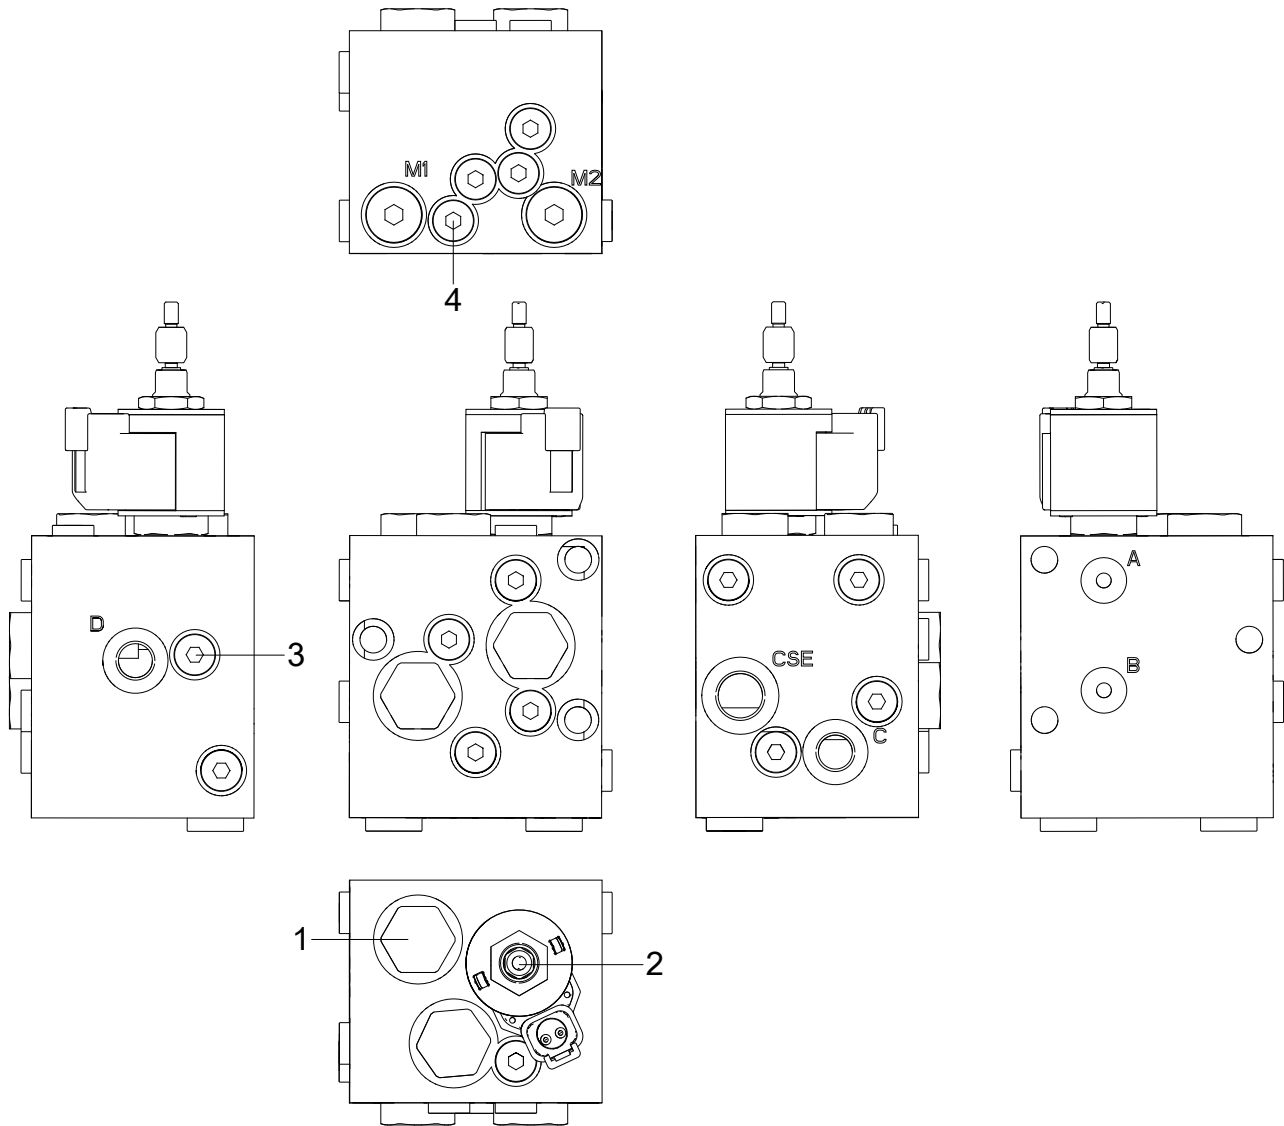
Lower lift control valve (PN.202040003326)/(PN.202040000271)-1000176
